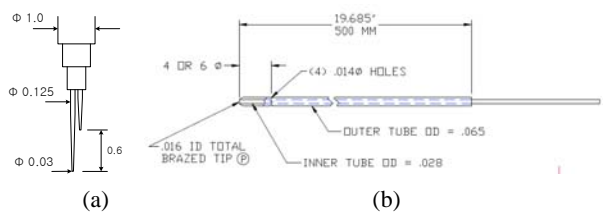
A two-sensor optical probe (a) and a Pitot tube (b)
